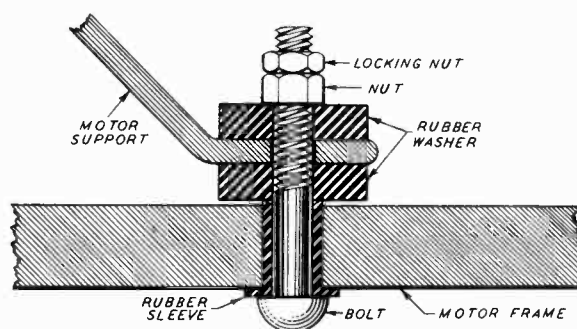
In order to keep the vibrations of the rotating motor away from the motorboard, rubber is used between the motor support and the motorboard as indicated.
